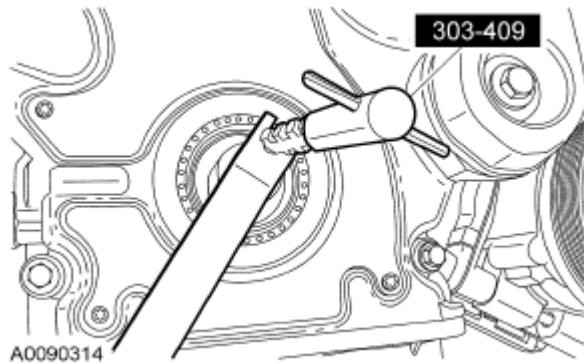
Removing Crankshaft Front Seal Using Special Tool (303-409)
